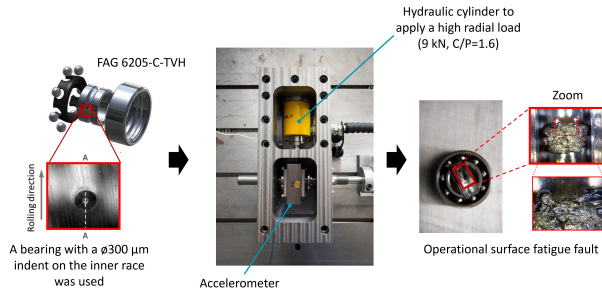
Illustration of the initial bearing state (left), the experimental test rig setup designed to perform accelerated life tests (middle), and the final state, a surface fatigue fault at the inner race of the bearing (right).
